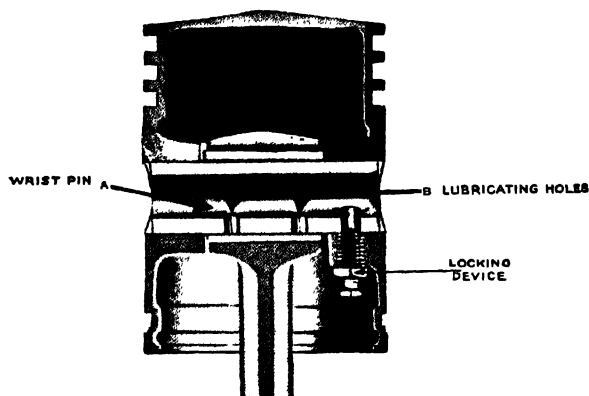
Section of Piston and Wrist Pin, Showing Method of Assembly.
